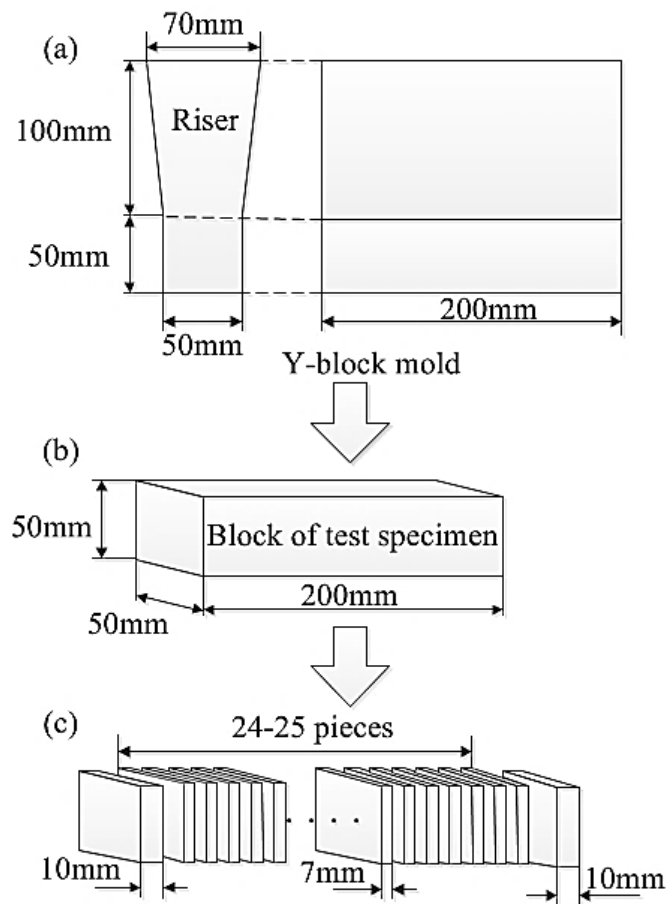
Schematic drawings of processes for making test pieces of abrasive wear tests from ingots.
